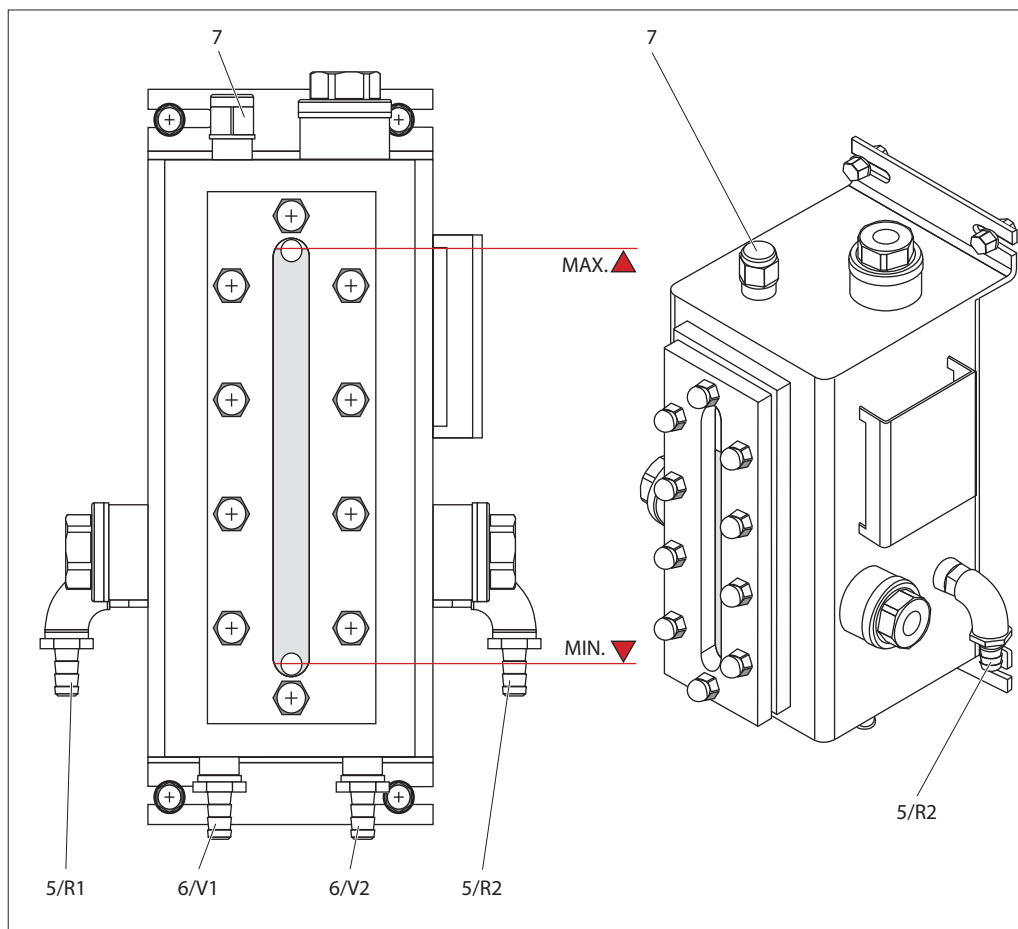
Buffer reservoir with connection options - front view and angled view. For the complete designation of the individual parts see chapter "10.12 Simon 3 LSQ storage container"
